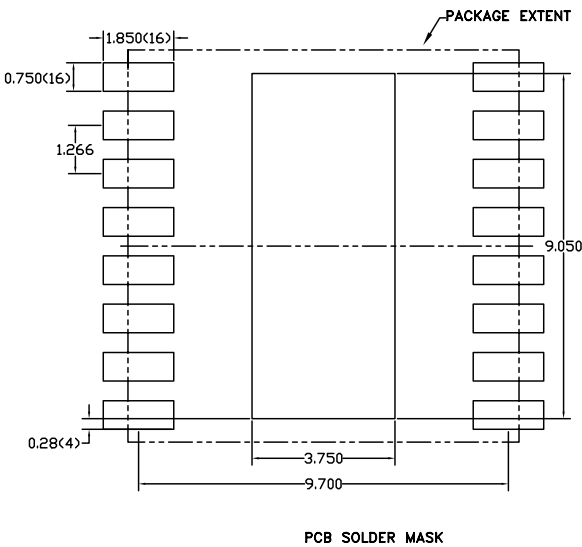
S7 Package Outline - 16 Pin Wide Body SOIC with Heat Slug
